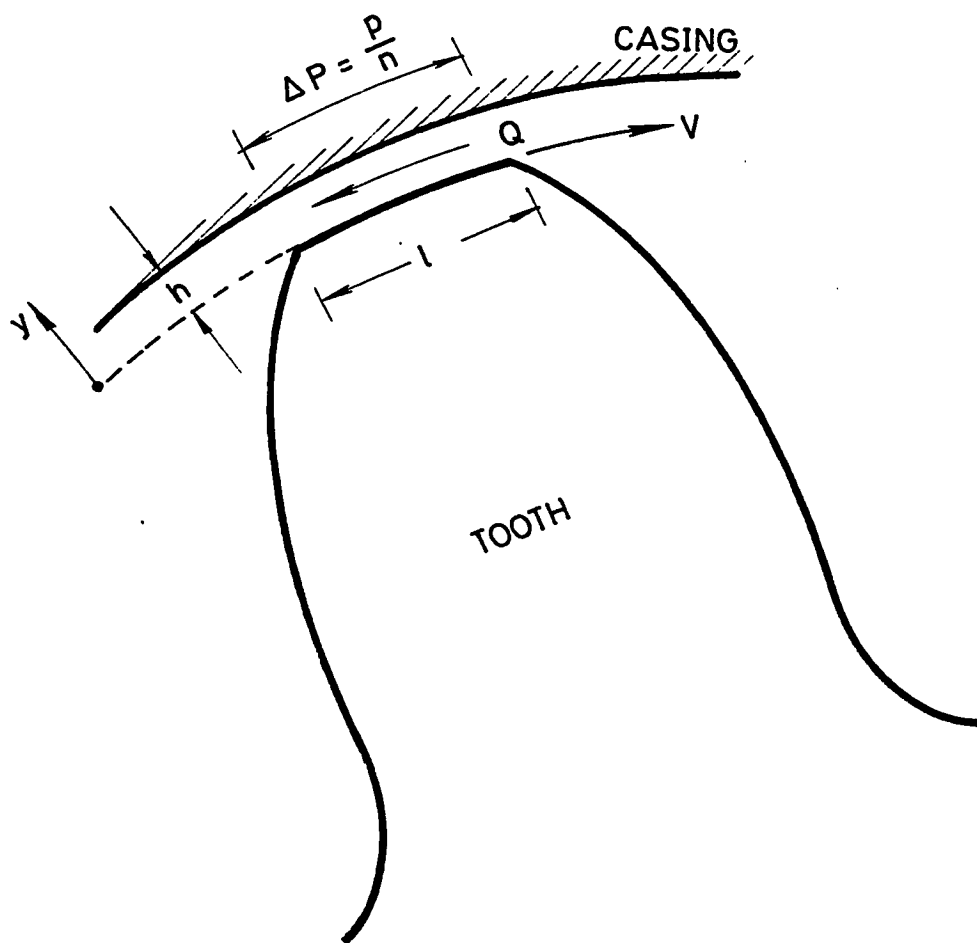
CONFIGURATION OF TOOTH AND CLEARANCE
